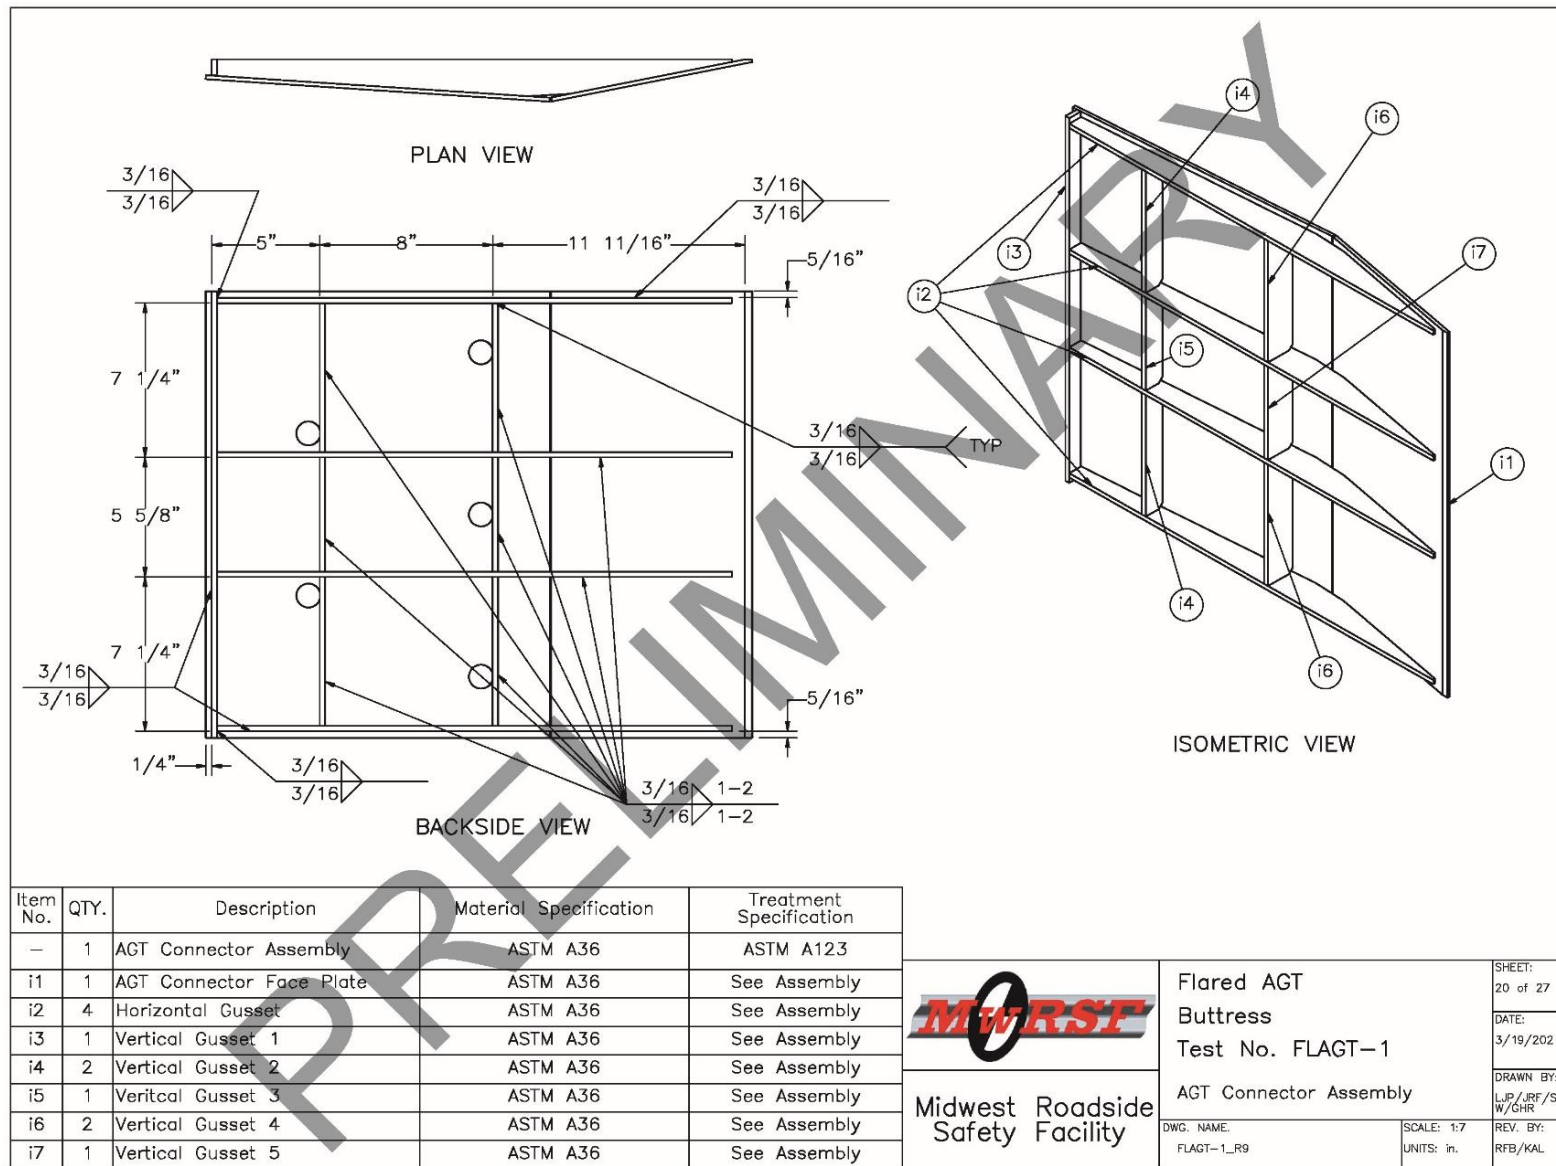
AGT Connector Plate Assembly, Test No. FLAGT-1
